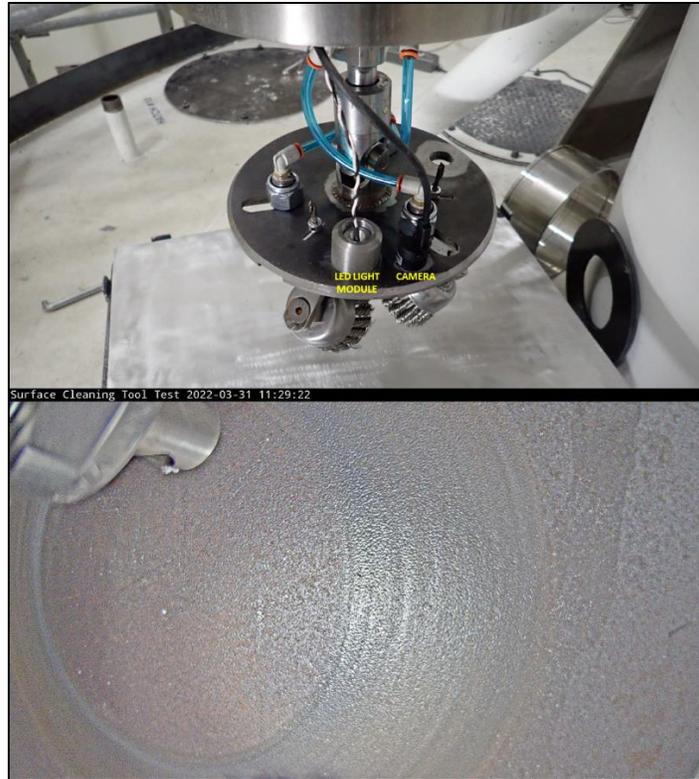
LED light module mounted on surface cleaning tool (top) and image from the camera captured during a mechanical test
